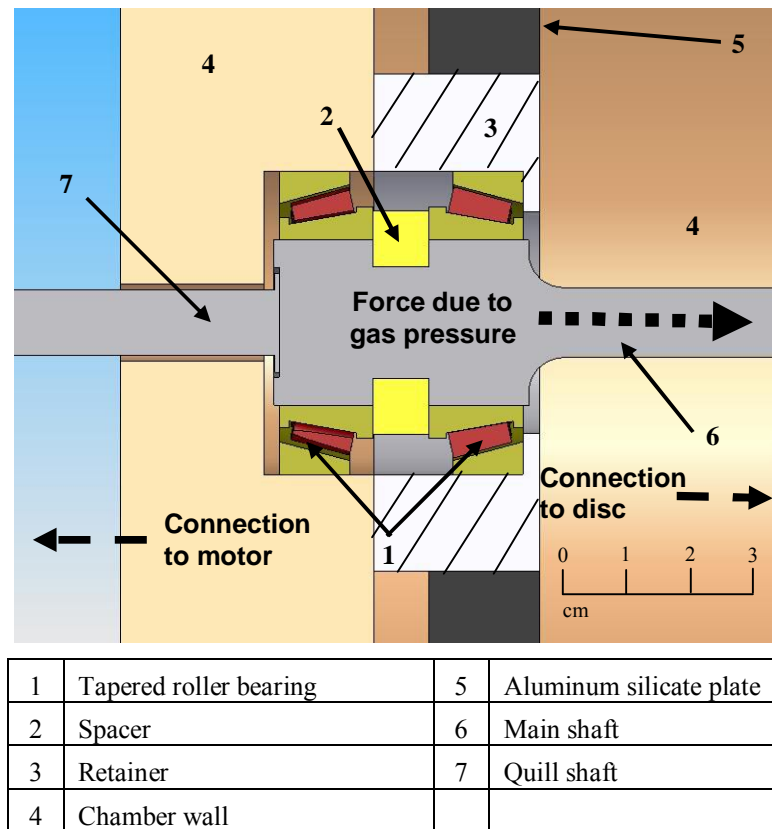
Cutaway view of the shaft support with tapered roller bearings.
